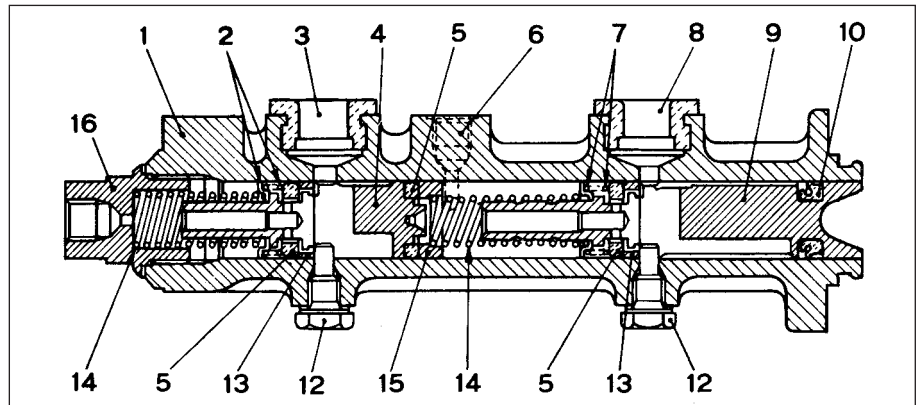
Sectional view of master cylinder (Sec 9)
